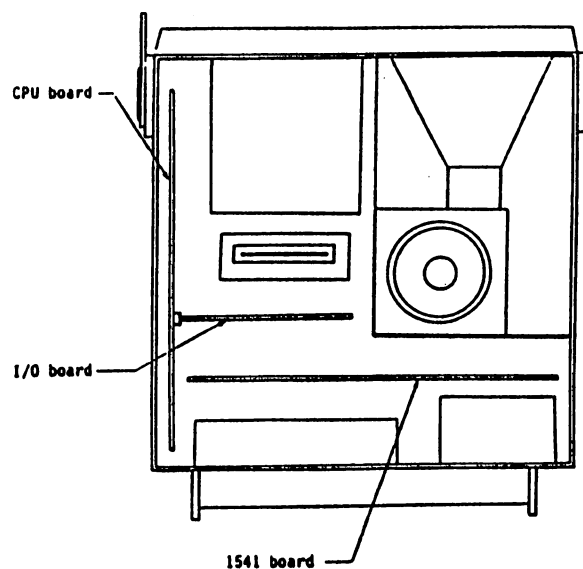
SX-64 CIRCUIT BOARD LAYOUT
